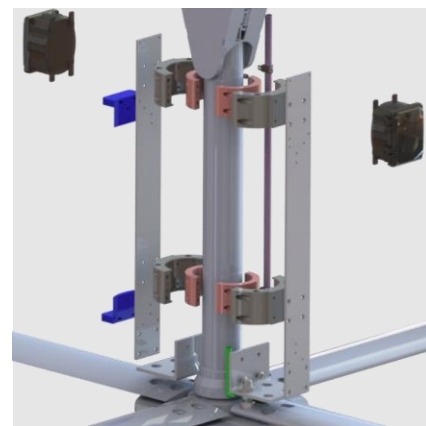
RENDERING OF EXPLODED VIEW OF THE TURBINE INSTRUMENTATION MAST.
